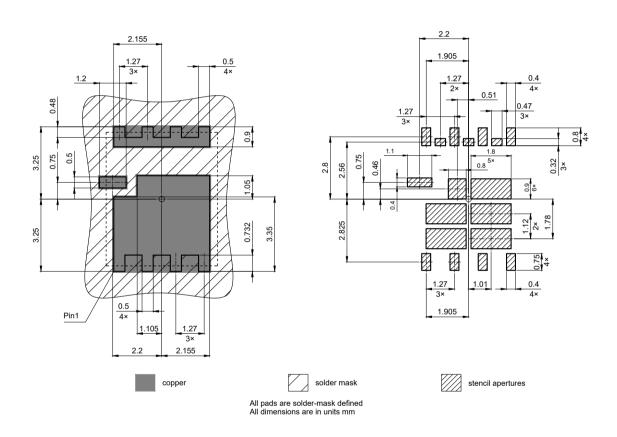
Outline PG-WHTFN-9, dimensions in mm
